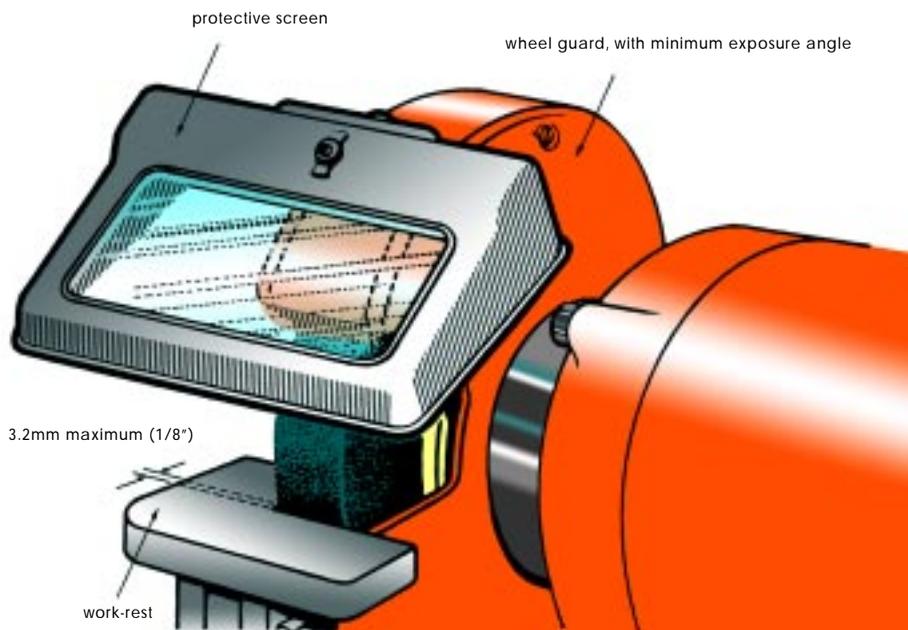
A grinding wheel fitted with wheel guard, work-rest and protective screen.
